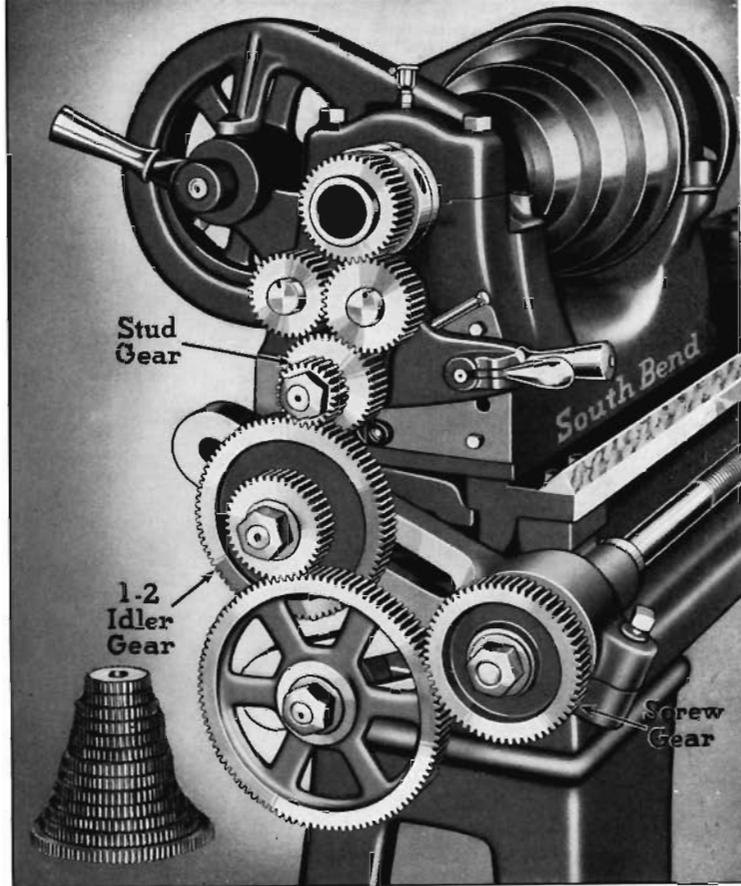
Standard Change Gear Lathe with gear guard removed to show change gears.
